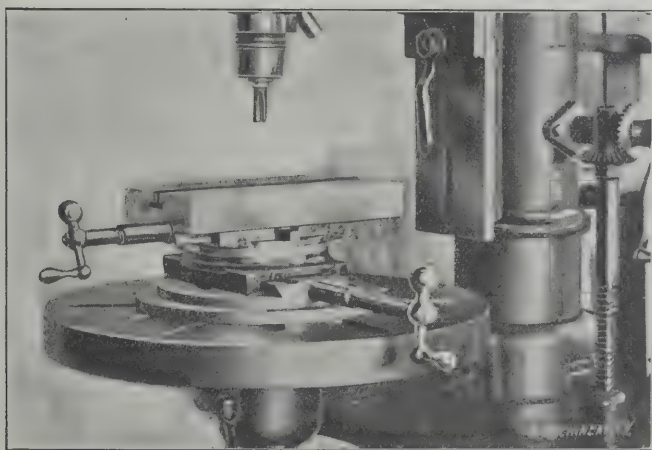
The Cutter Spindle, its Worm-gear Drive and Axial Adjustment
